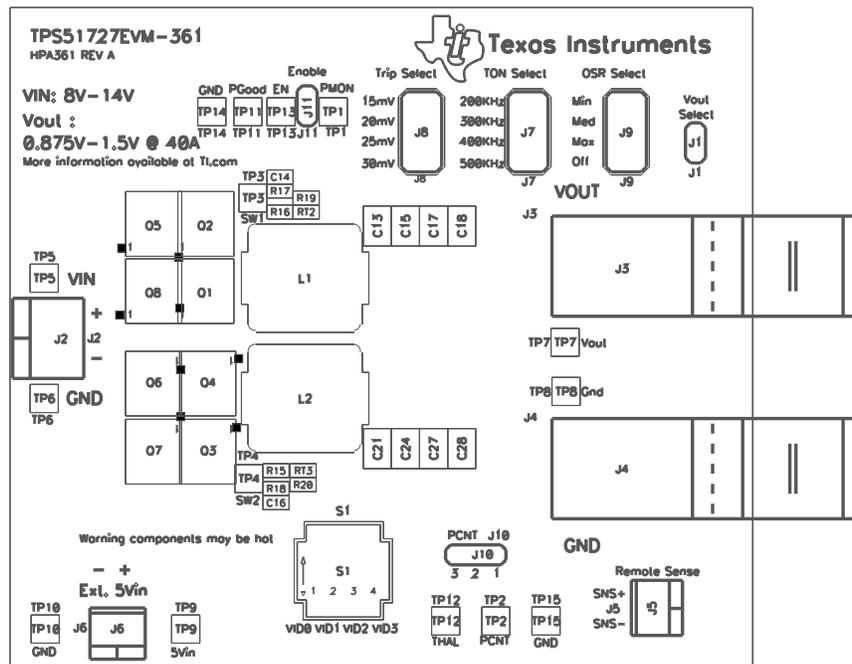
TPS51727EVM Top Layer Assembly Drawing, Top View
